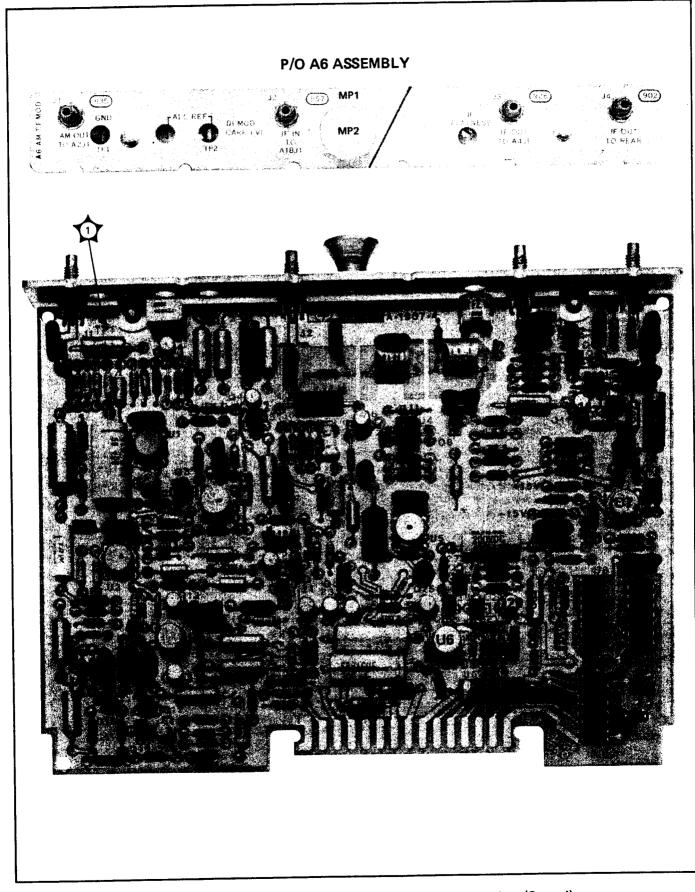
P/O A6 AM Demodulator Assembly Component Locations (Control)
